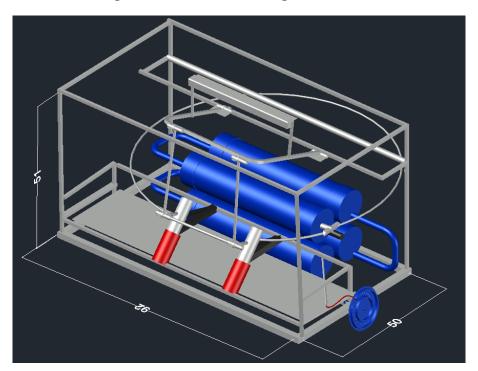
Drivetrain - pump - storage of compressed air system and generator module (Units measured in centimeter (cm))
